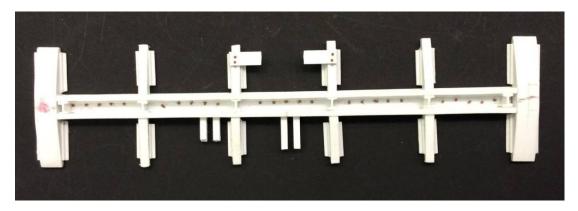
Underframe and AB brake system support pieces, note rivets on steel plate and on the air reservoir mounting supports
